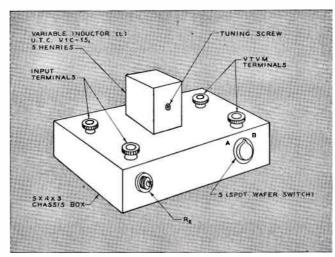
The rejection filter can be built into a $5 \times 4 \times 3$ -inch Minibox as shown above. The choke is mounted on top of the chassis so that the tuning screw will be easily accessible,
